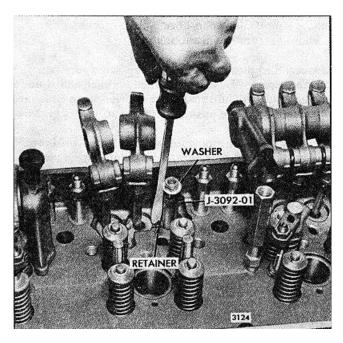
Removing Push Rod from Upper Side of Cylinder Head
